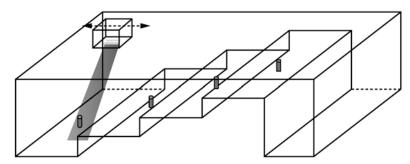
Scanning End-Drilled Holes to Obtain Beam Dimensions in Passive Plane
